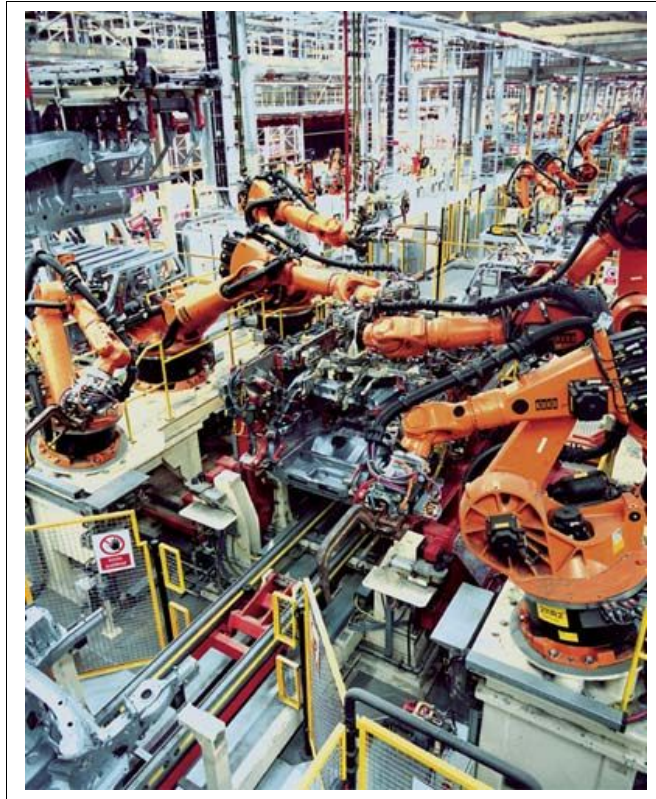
KUKA Industrial Robots assembling a vehicle underbody
